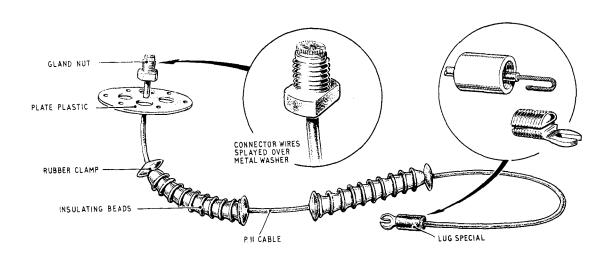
MAKING THE HF AERIAL CONNECTOR
